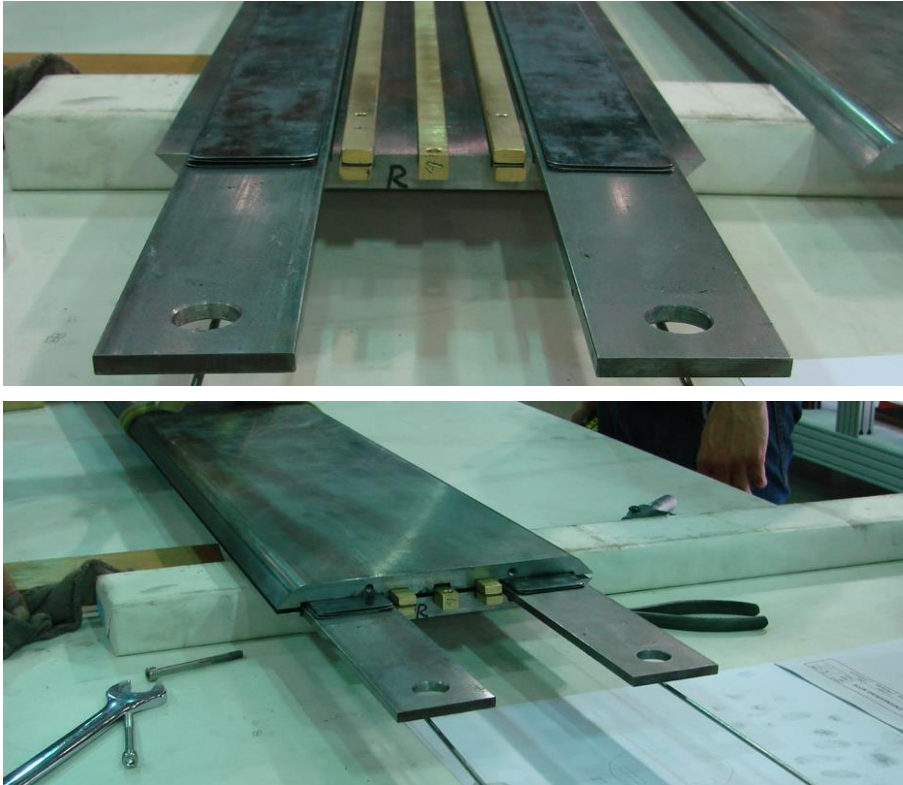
(Top) Kitting the master key packages; (bot) assembled master key package.
